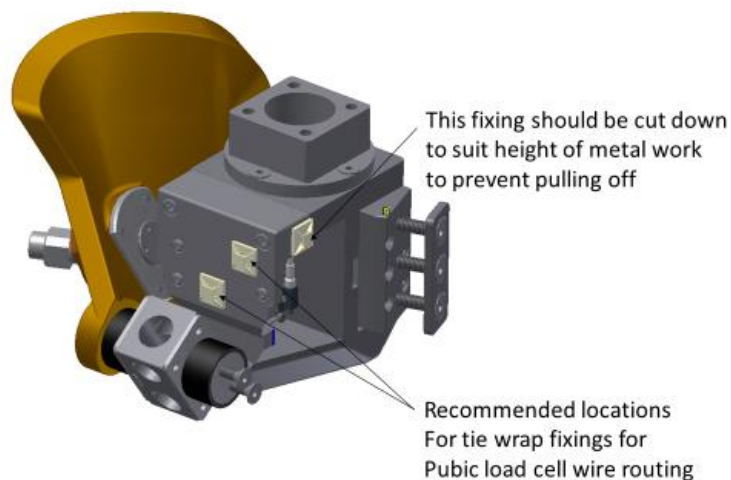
Picture showing recommended wire routing to Pubic Load Cell
